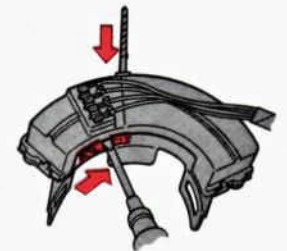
B—Inserting Pin In Type “B” Switch And Moving Carrier To Right With Tool
